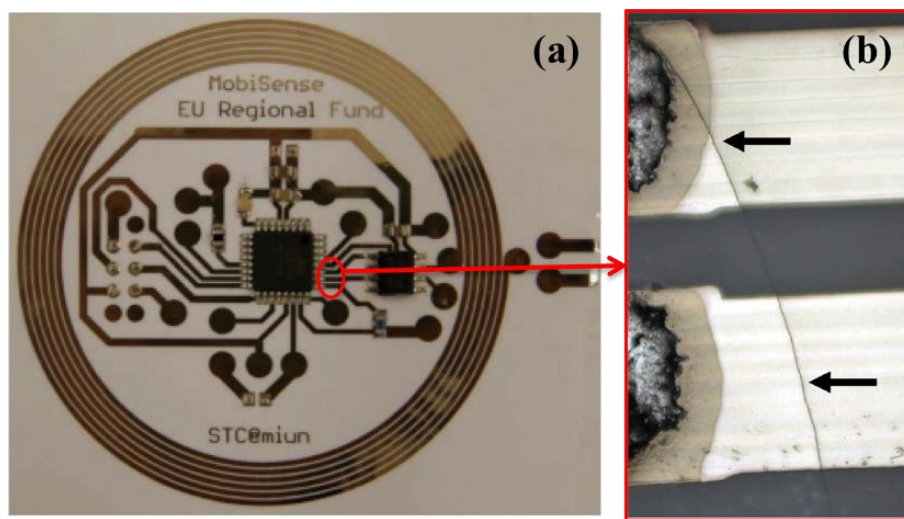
(a) NFC tags with quad flat package (QFP) and two-port packages soldered. (b) Magnification image of cracks on the paper coating and hence on the conductive strips, as indicated by arrows. Image from <sup>91</sup>.
